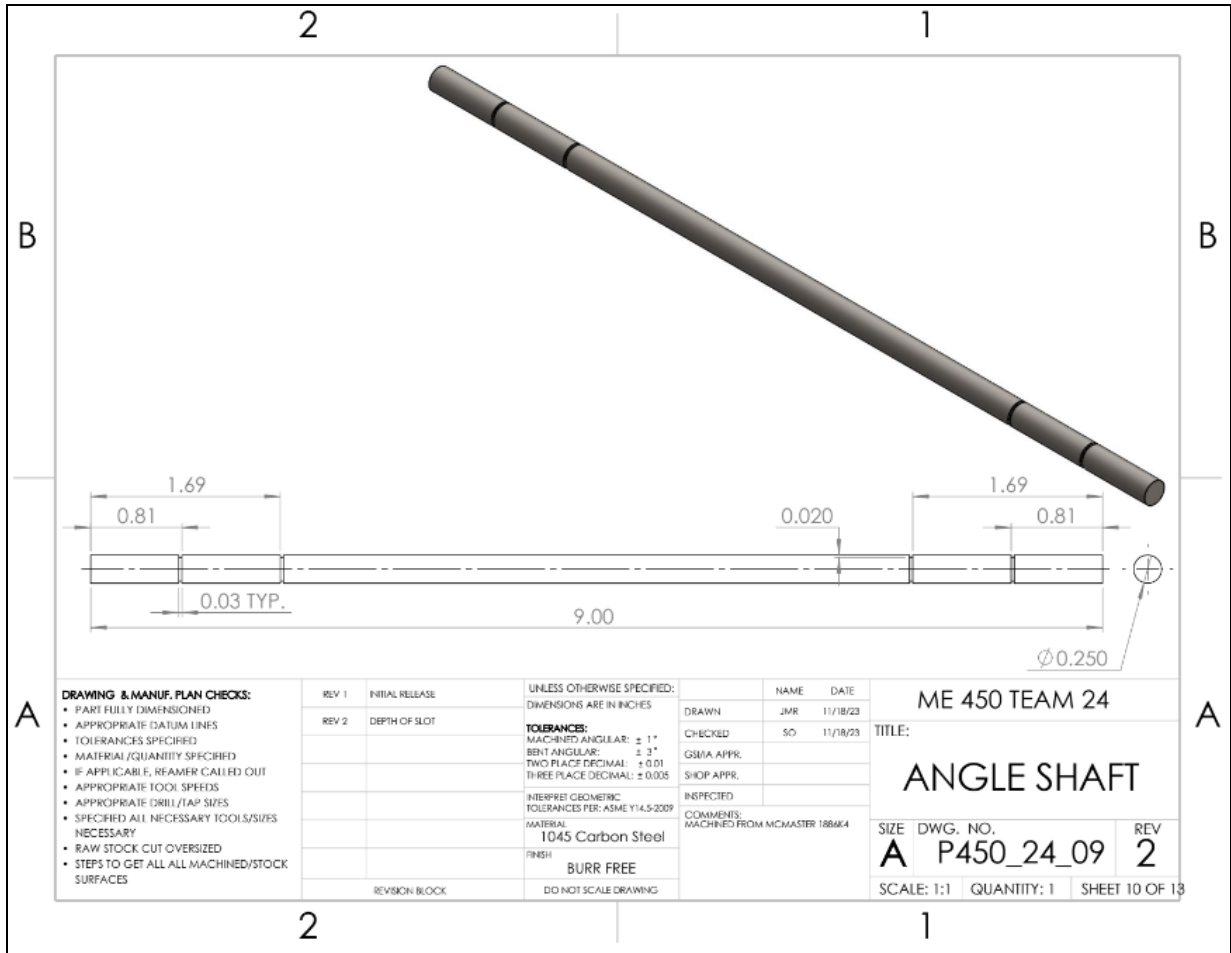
Manufacturing drawing for the angle shaft component of the beta design.
